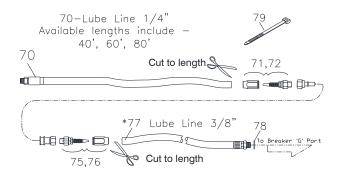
Cut-to-Length and Assemble Lube Lines
